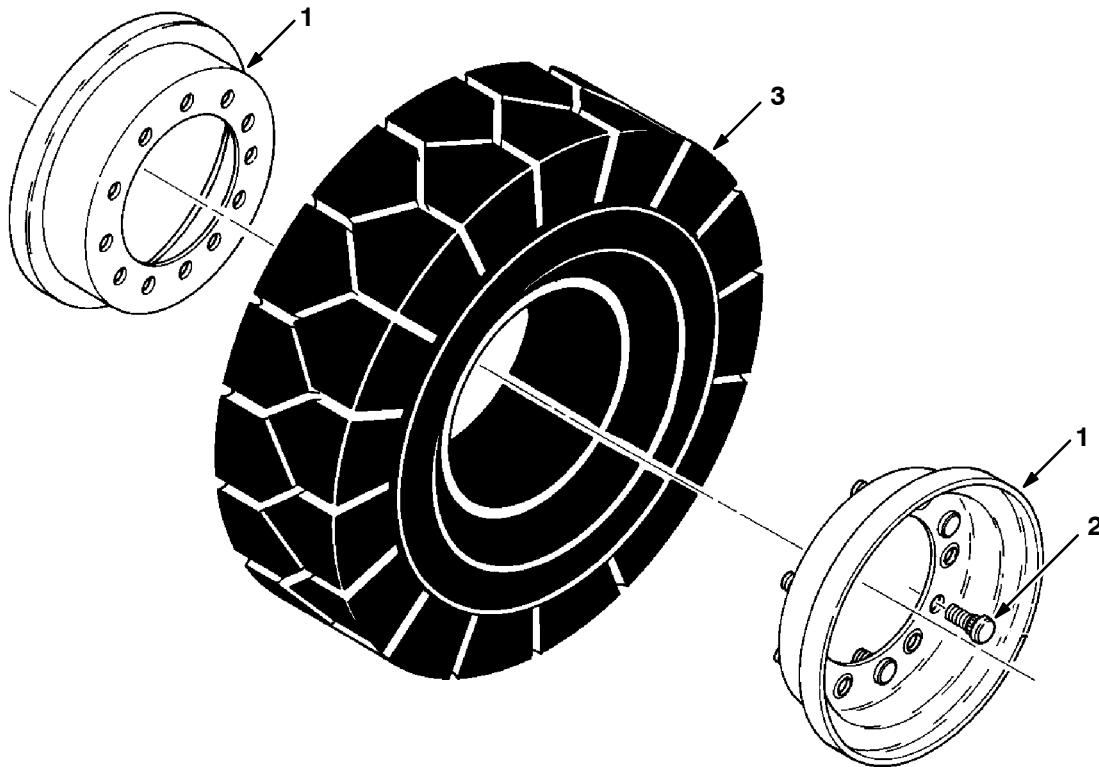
Rear Wheel Assembly, Multi-Level Dump
